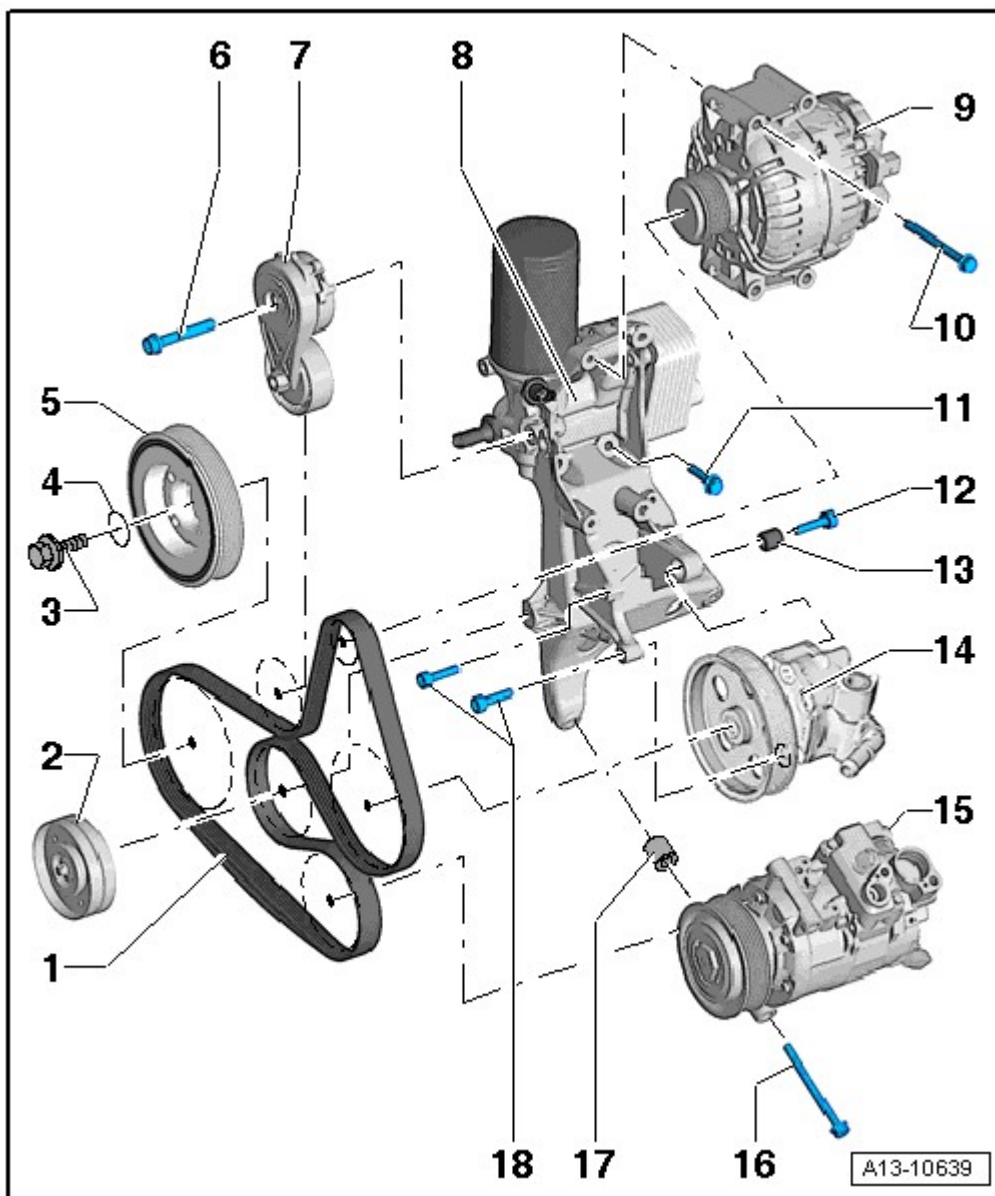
Identifying Ribbed Belt Drive And Auxiliary Component Bracket Overview
